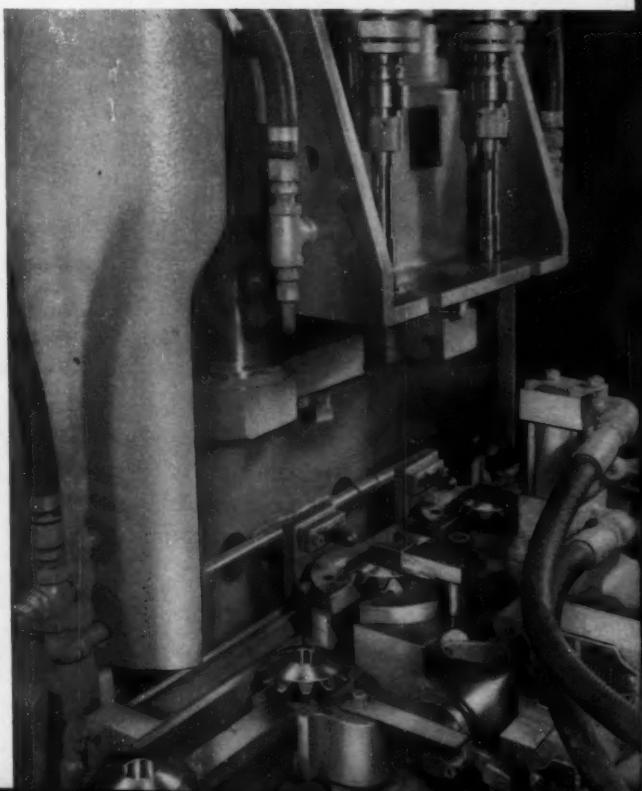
Dual-spindle honing machine with shuttle fixture is used to finish the pinion bores to a surface finish of 15 micro-inches.
